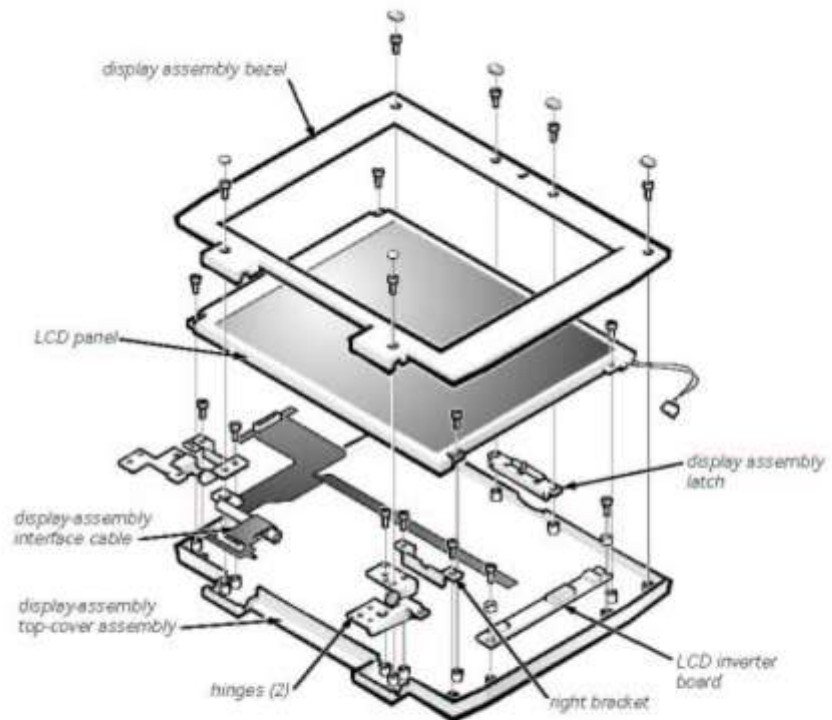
Exploded View—Display Assembly (12.1-Inch Display Shown)
